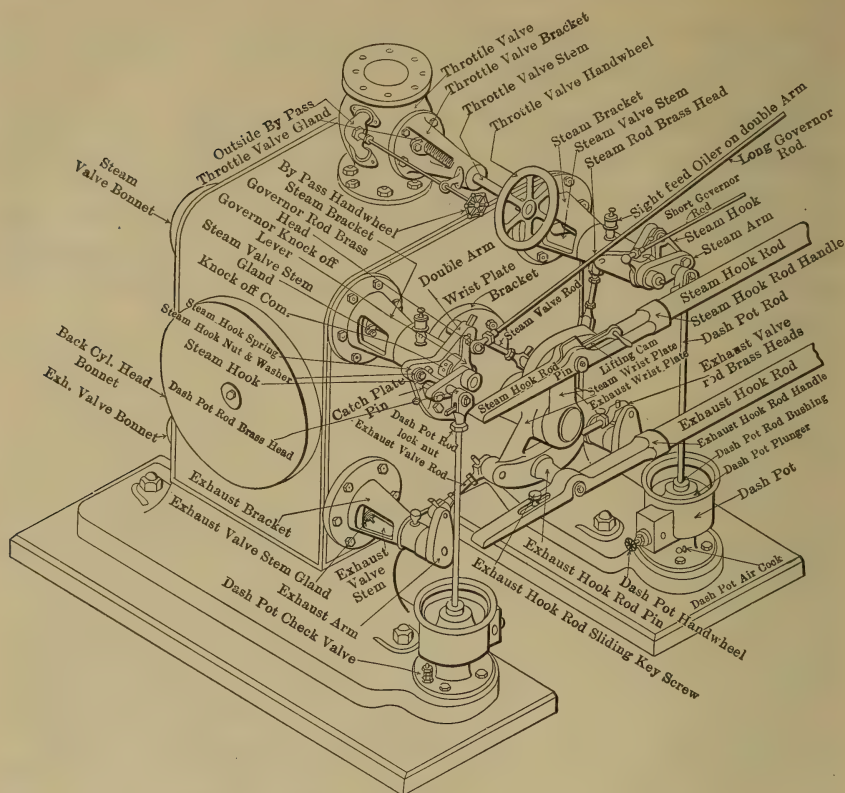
Assembly of Valve Gear; Typical Corliss Engine.
